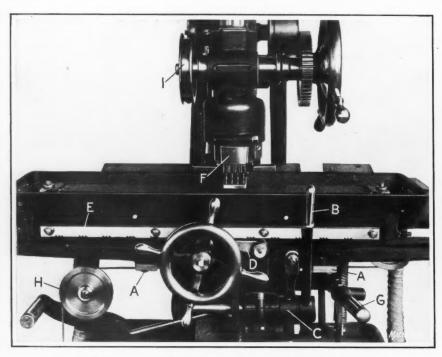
Close-up View of Langelier Drilling Machine, showing Special Features
